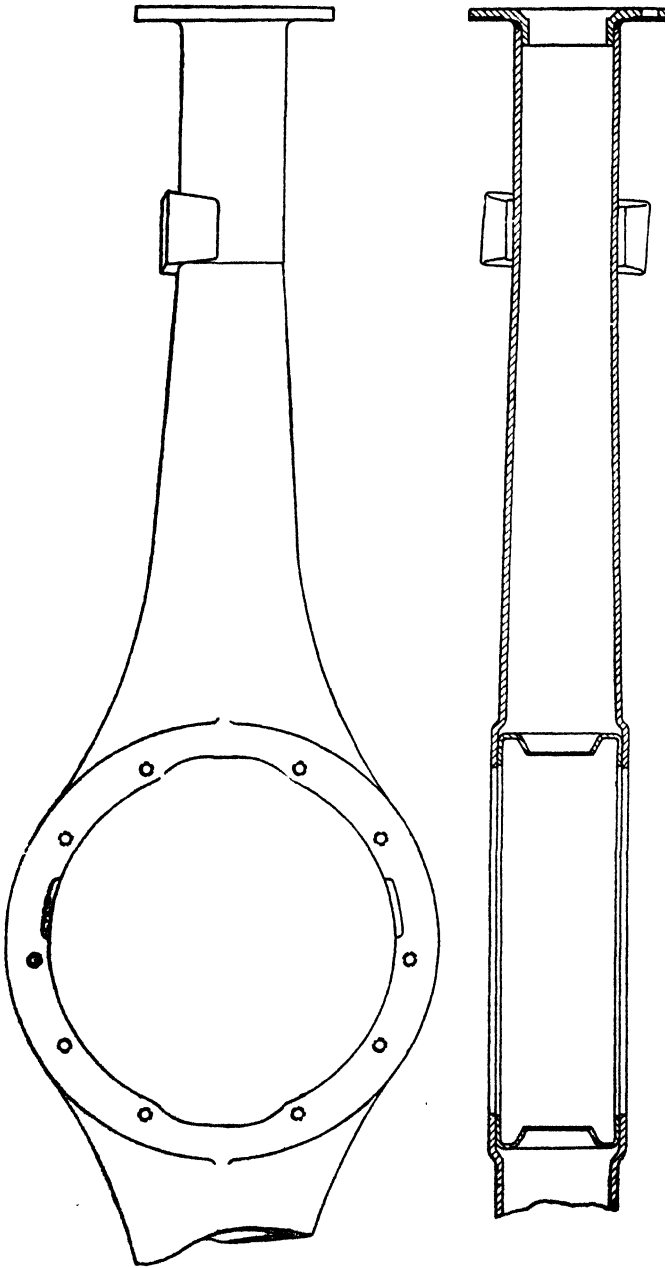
PRESSED-STEEL AXLE HOUSING.
